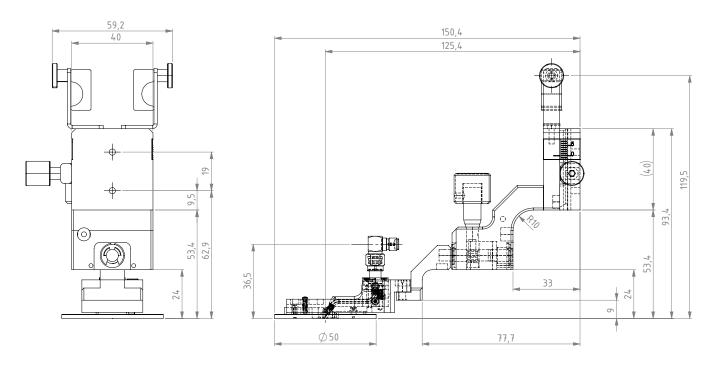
CC-TLP-50-A1 dimensions in [mm]
